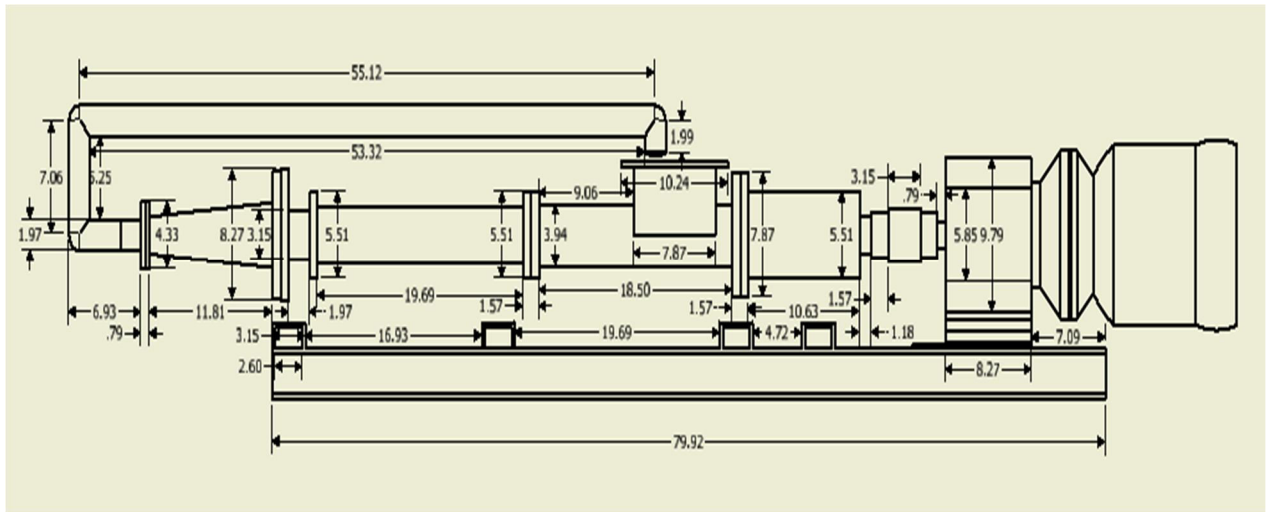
2D sketch with dimension (in mm) of UAFM
